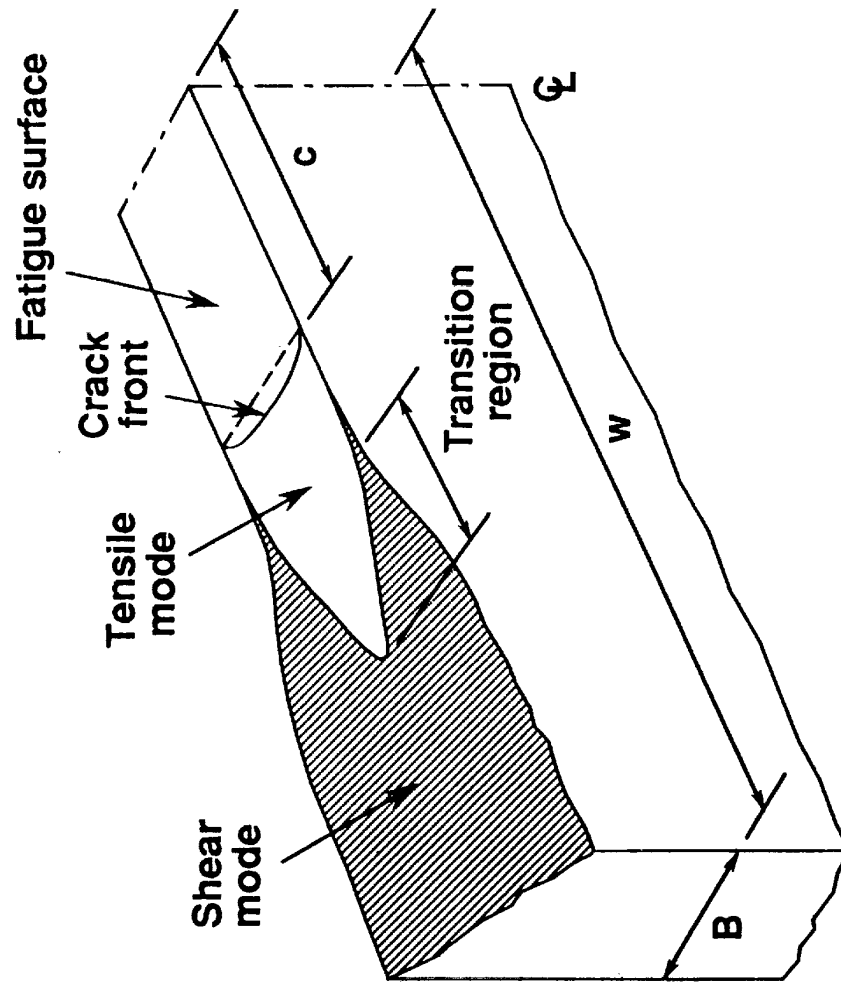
Fatigue crack surface with transition from tensile to shear mode.
